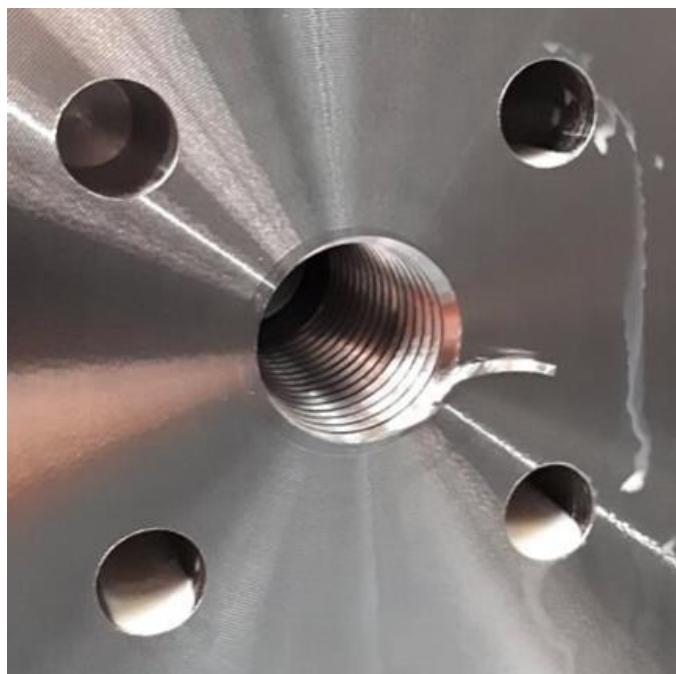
Central thread machined using thread milling tool with cutting inserts.
